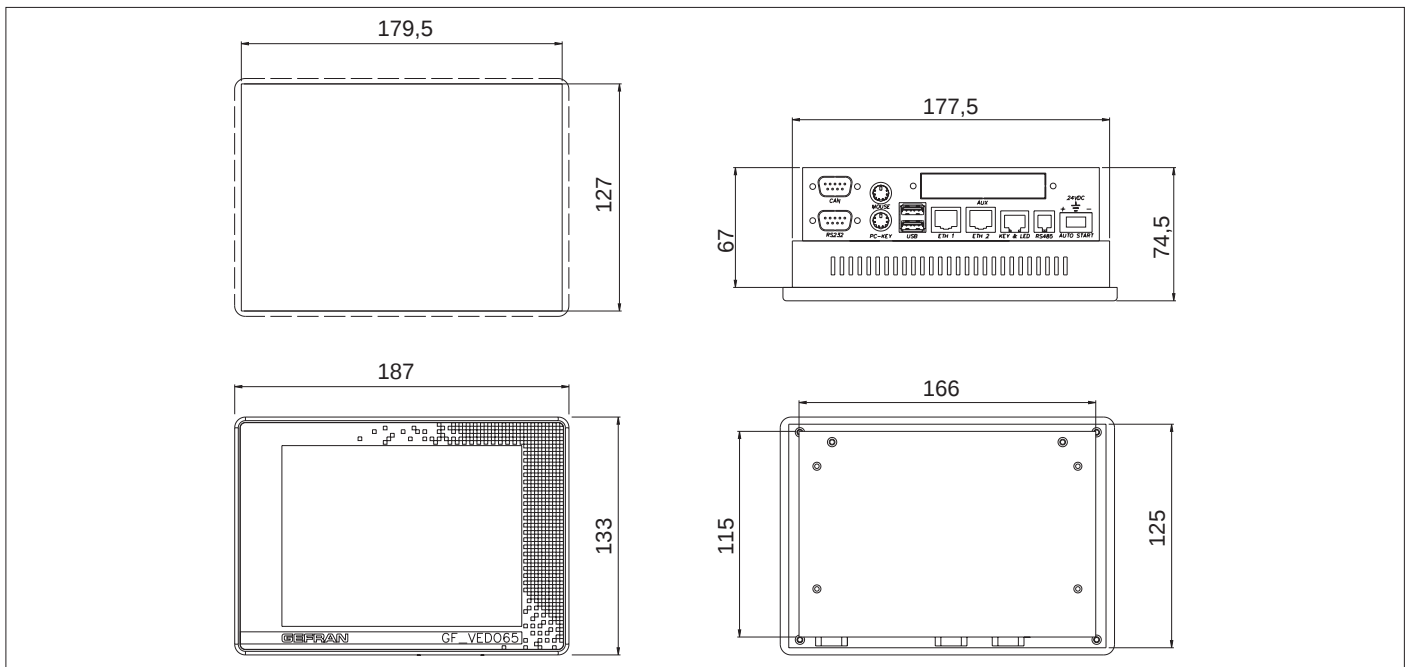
Dimensions and cut-out GF_VEDO 65CT
